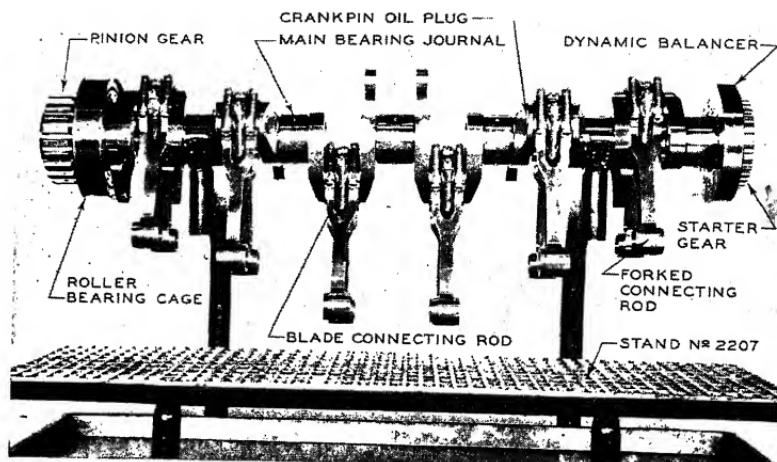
A convenient stand for overhauling crankshaft and connecting rod bearings.
